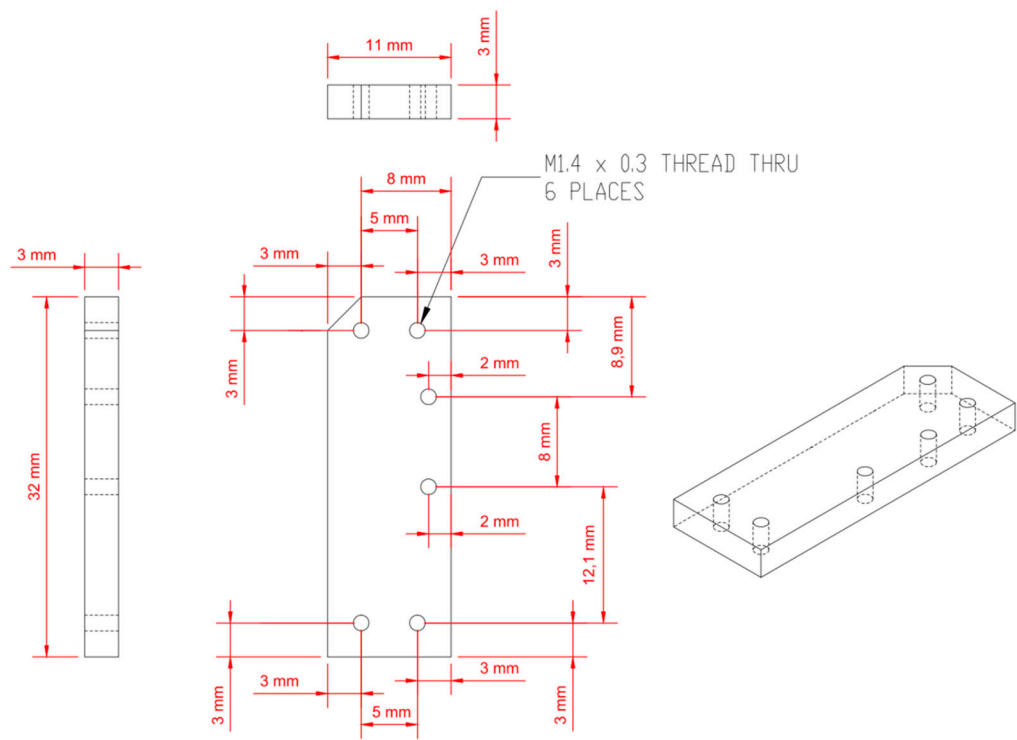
Detailed mechanical drawing of Part C3 from Figure S18.
